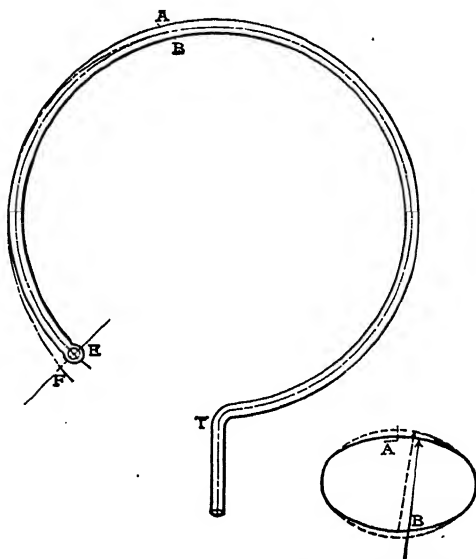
Bourdon-tube device for pressure-type thermometers.
